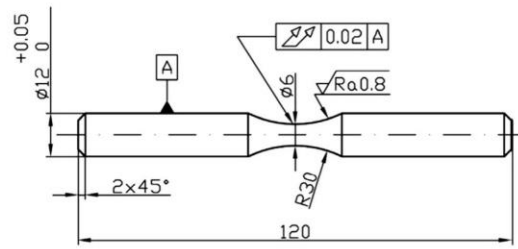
Geometry of fatigue test specimens (all dimensions are in mm).
